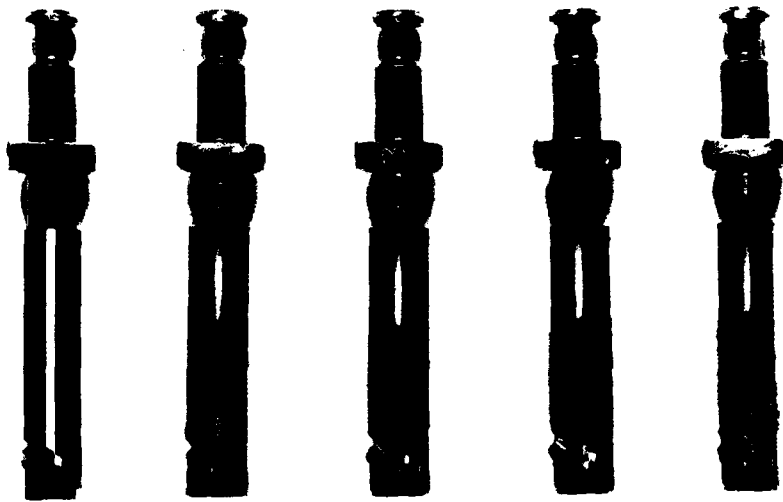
MERCEDES NEW AND USED PUMP PLUNGERS, VIEW 1
